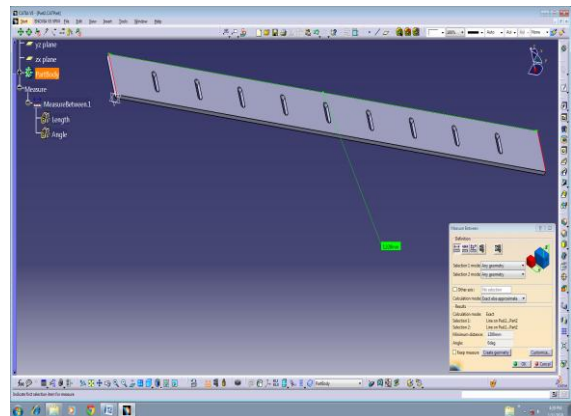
General Arrangement Drawing of Fixing Plate for Scraper Rubber
